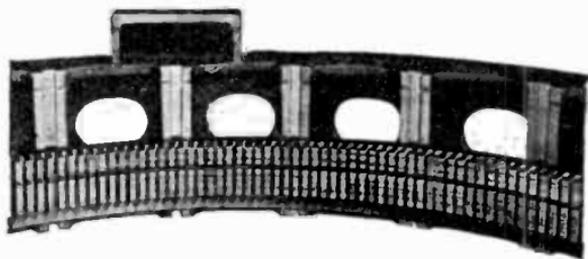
,237.—Westinghouse vertical water wheel alternator armature assembly.
